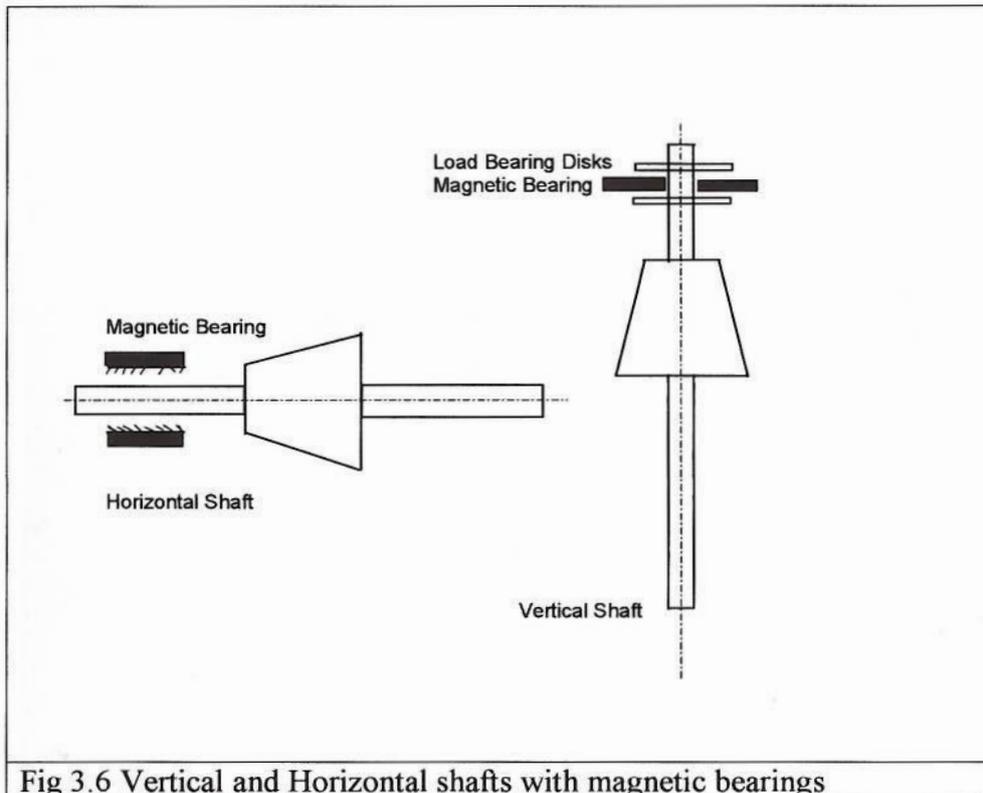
Vertical and Horizontal shafts with magnetic bearings
